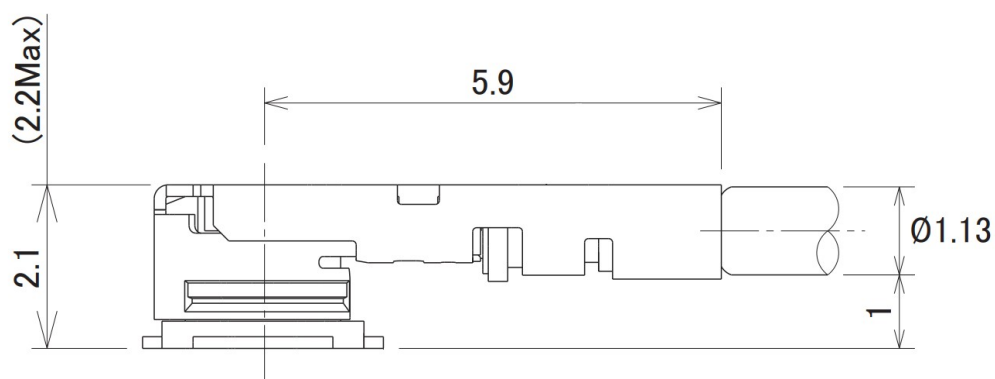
Space Factor of Mated Connectors (Ø 1.13 mm Coaxial Cables) (Unit: mm)
